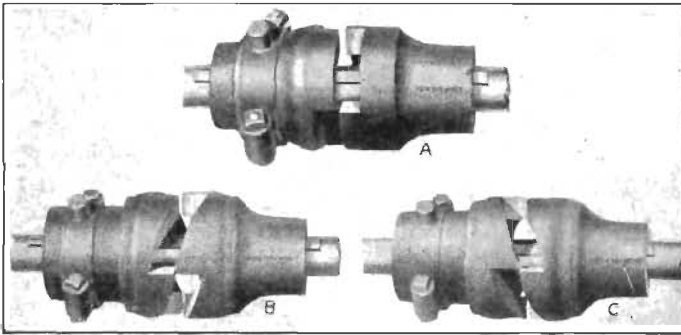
Types of positive clutches: A, square-jaw clutch coupling; B, left-hand spiral-jaw clutch; C, right-hand spiral-jaw clutch.
